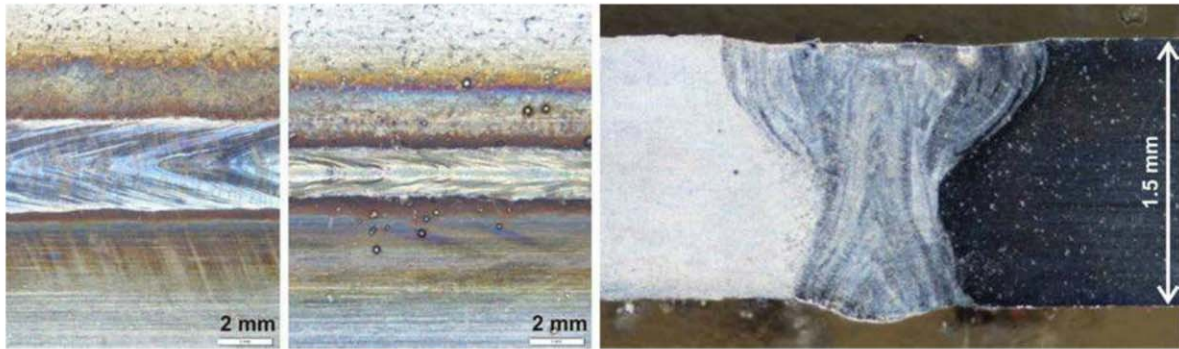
Face side, back side and cross-sectional view of a TIG-welded joint made without gap
